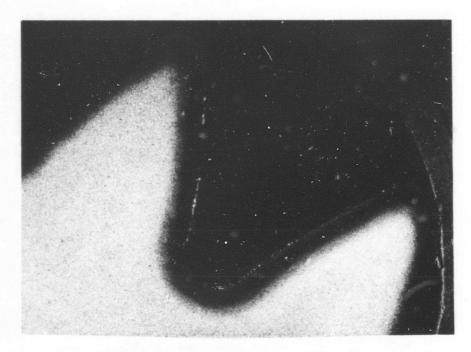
Blacklight Photograph of Test Gear, Showing a Crack Across the Helical Involute and Section Through Tooth Showing Carburized Case Depth.
